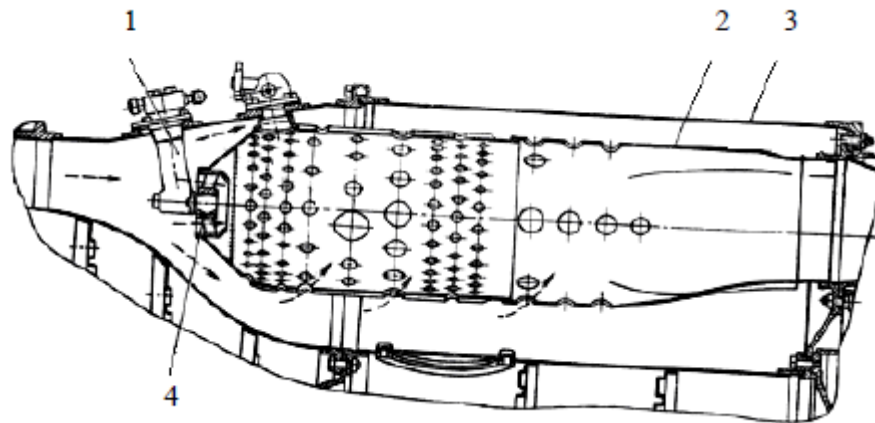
Tubular-annular combustion chamber: 1 - nozzles; 2 - fire tube; 3 - camera casing combustion; 4 - stabilizer (swirler)
